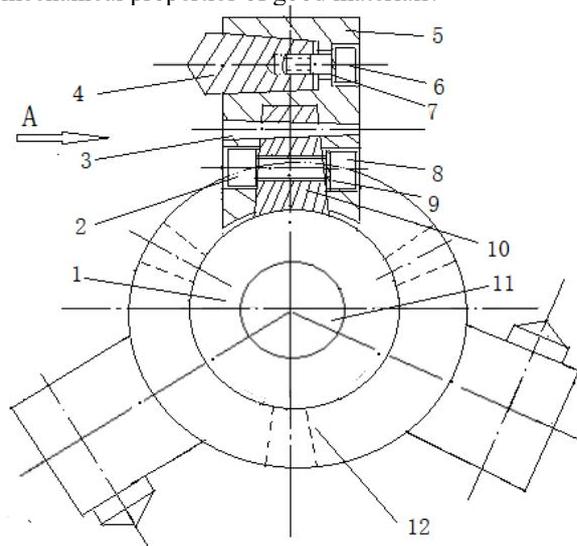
Schematic diagram of improved ring gear and cap type crushing gear
